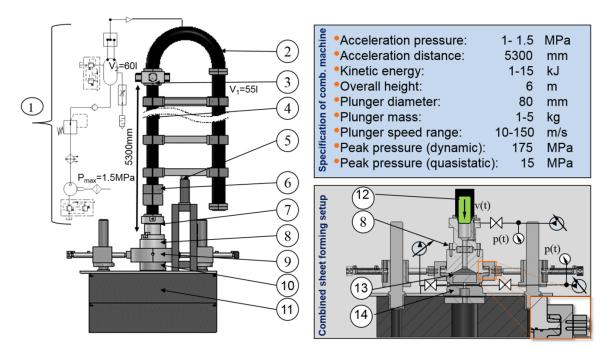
Pneumo-mechanical setup: 1 - pressure generation unit with secondary pressure tank; 2 - primary pressure tank; 3 - release mechanism; 4 - acceleration tube; 5 - lifting device; 6 - light barrier; 7 - tube adapter: 8 pressure chamber; 9 - locking ring; 10 - lower tooling adaptor (die); 11 machine bed; 12 - plunger; 13 - base plates; 14 - vent port.
